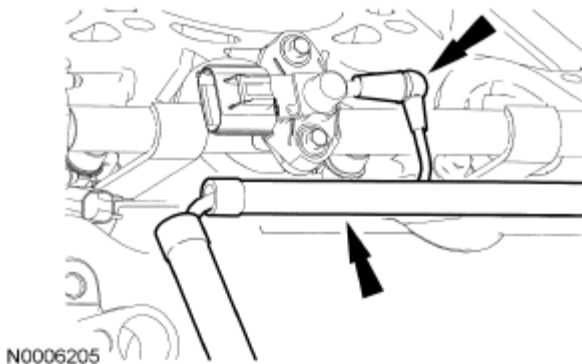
Locating Fuel Pressure And Temperature Sensor Vacuum Hose Fittings
